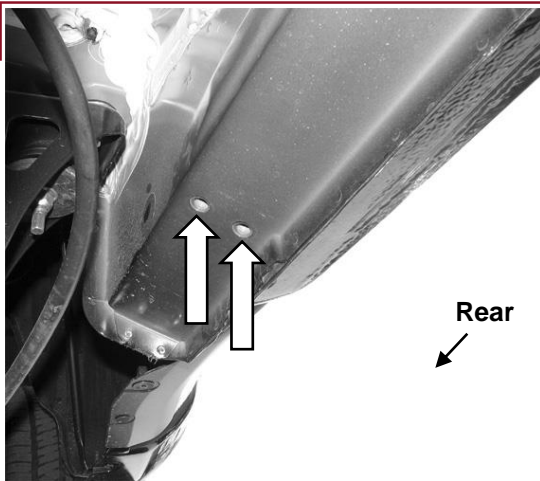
Attach Driver/Left Rear Mounting Brackets to the center and rear mounting locations.
